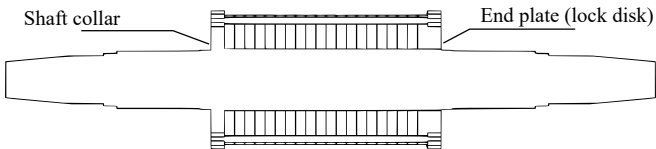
Thick-laminate rotor cross section with a shaft collar on one end and a lock disk or end plate on the other.
